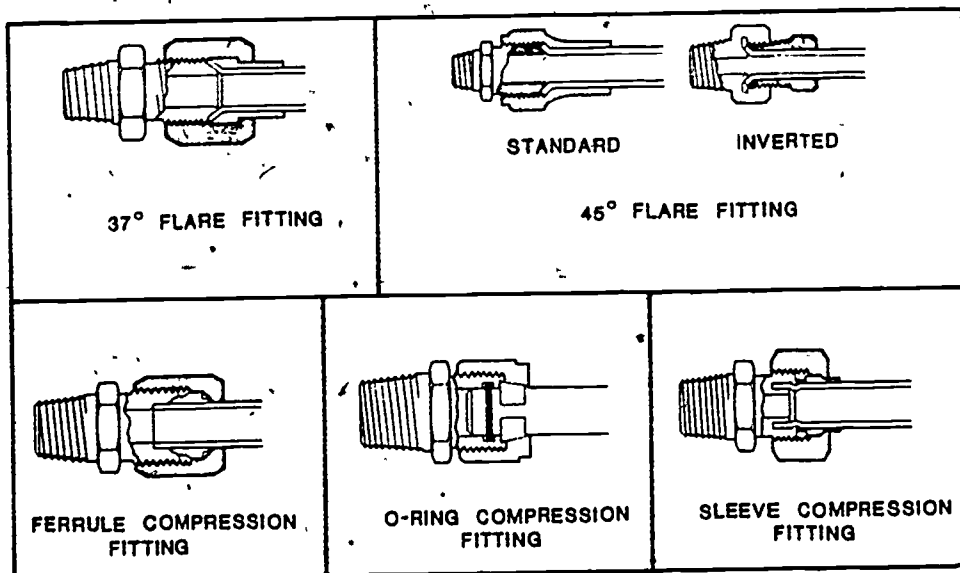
Threaded Fittings and Connectors Used with Tubing.
